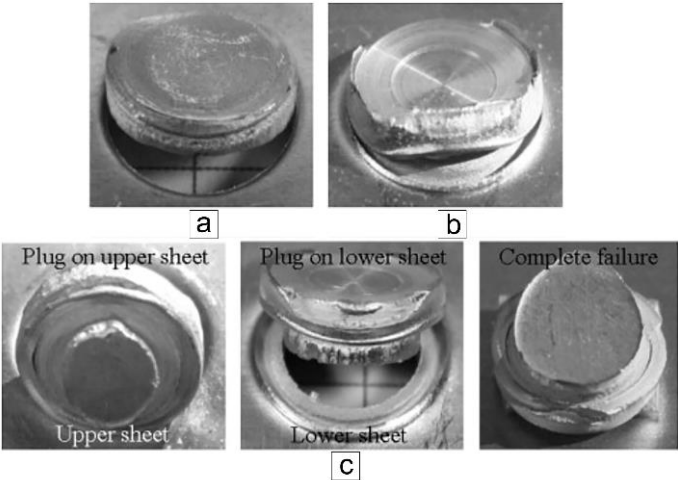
Friction spot-welded joints fracture modes in lap-shear tensile test: (a) through the interface, (b) plug pullout with tearing and (c) variants of plug pullout [39].
